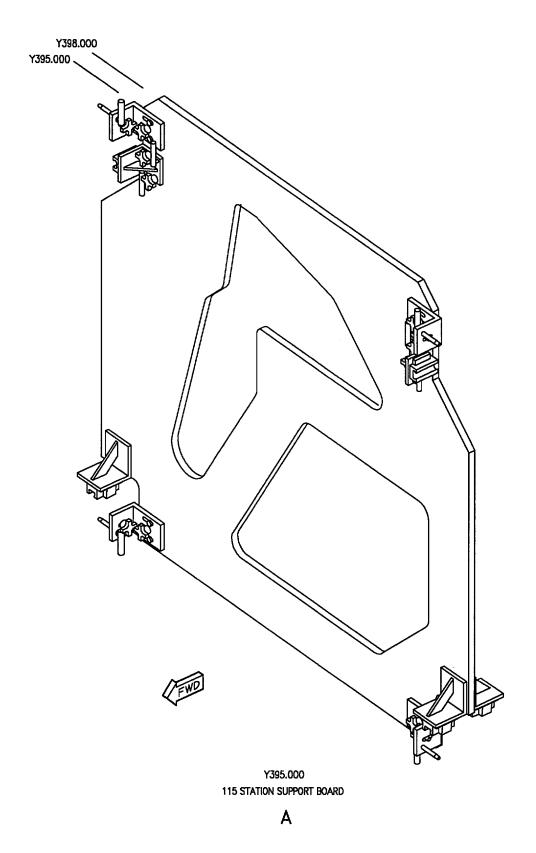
Engine Air Inlet Maintenance Fixture; RE174322020-1 (Sheet 2)
